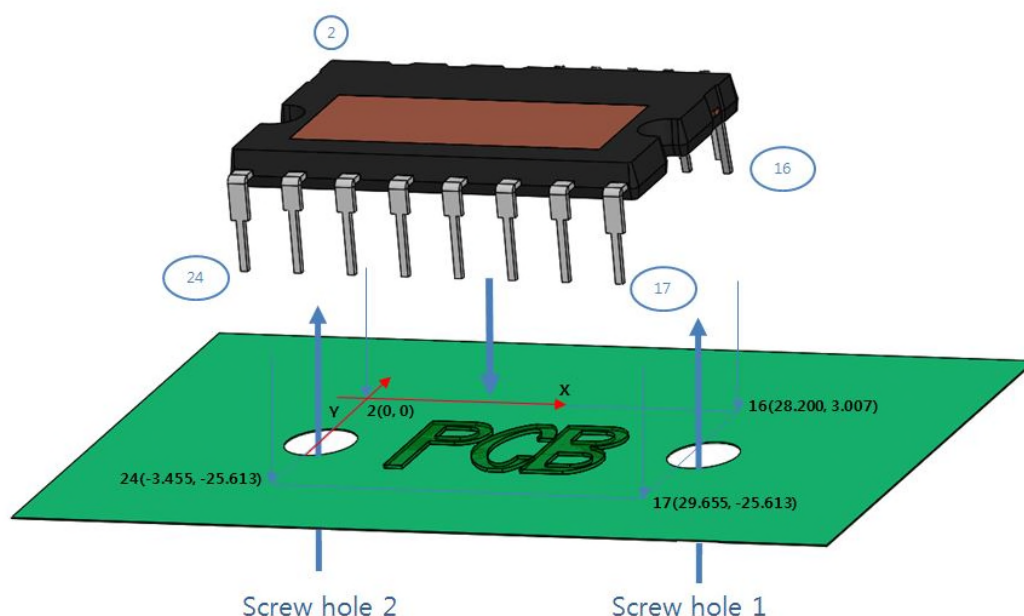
CIPOS™ Mini interleaved PFC IPM position on PCB (Unit: [mm])
